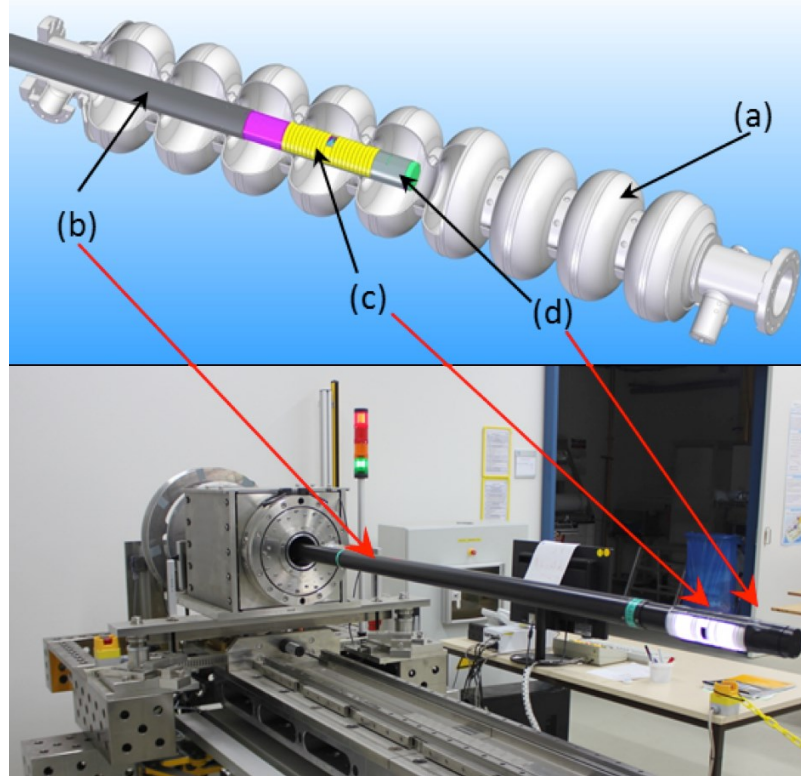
3D CAD view of the camera-cylinder inserted into the nine-cell cavity and real picture of the camera cylinder: (a) nine-cell cavity, (b) camera-cylinder, (c) cylinder-head with a mirror mechanism, and illumination unit (d)
